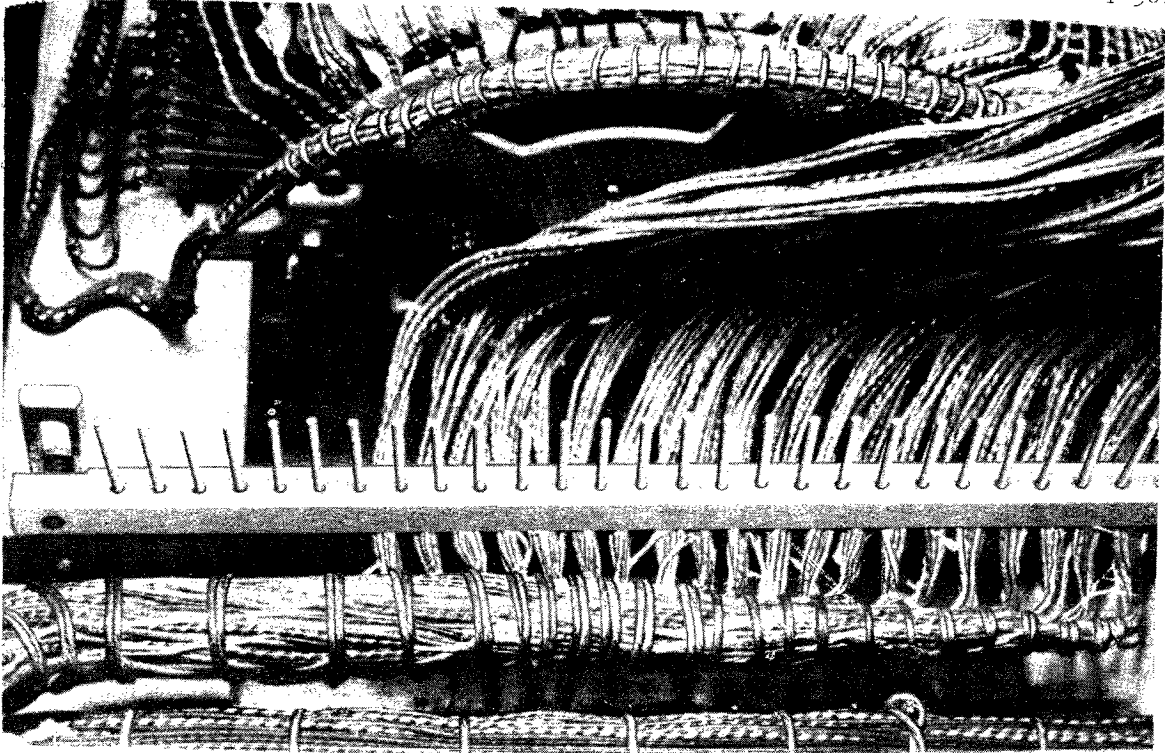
MOTOR UNISELECTOR FORMING JIG - FIRST STAGE COMPLETED AND LACED FORM
